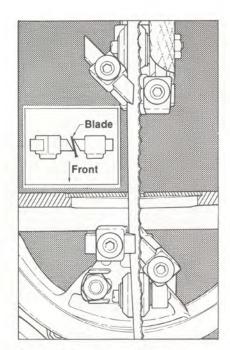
Push the left guide blocks in and adjust them so that they contact the blade toward the front, while the right guide blocks contact the blade toward the back.
